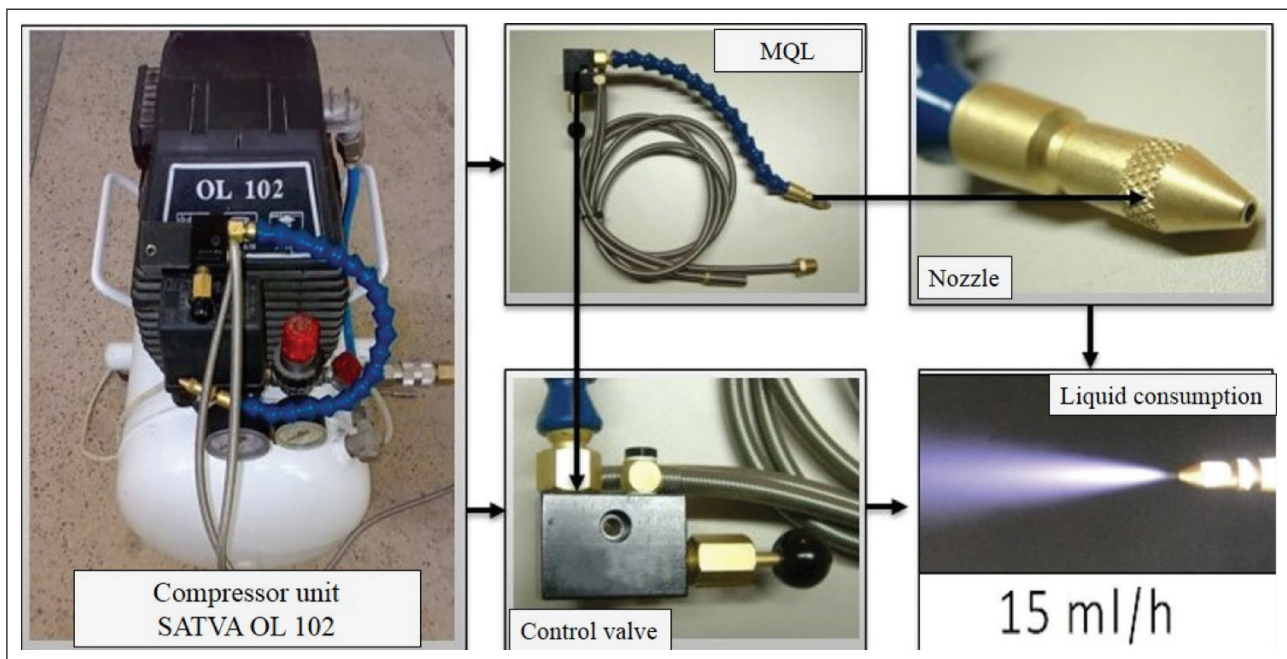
General view of the MQL and the SATVA OL 102 compressor unit.
